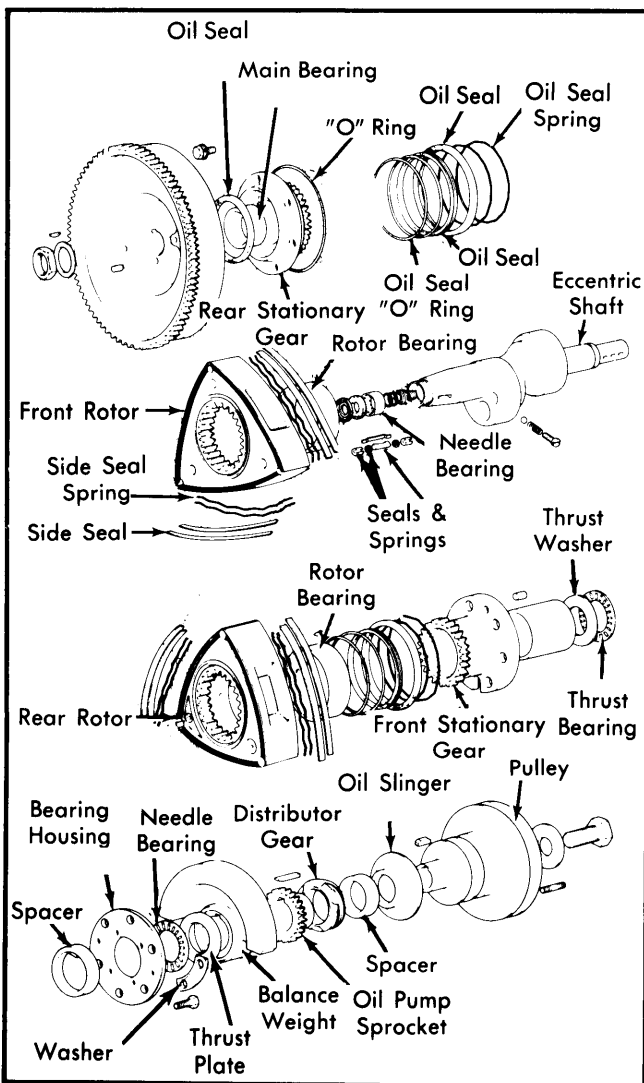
Exploded View of Rotors & Eccentric Shaft Assembly
